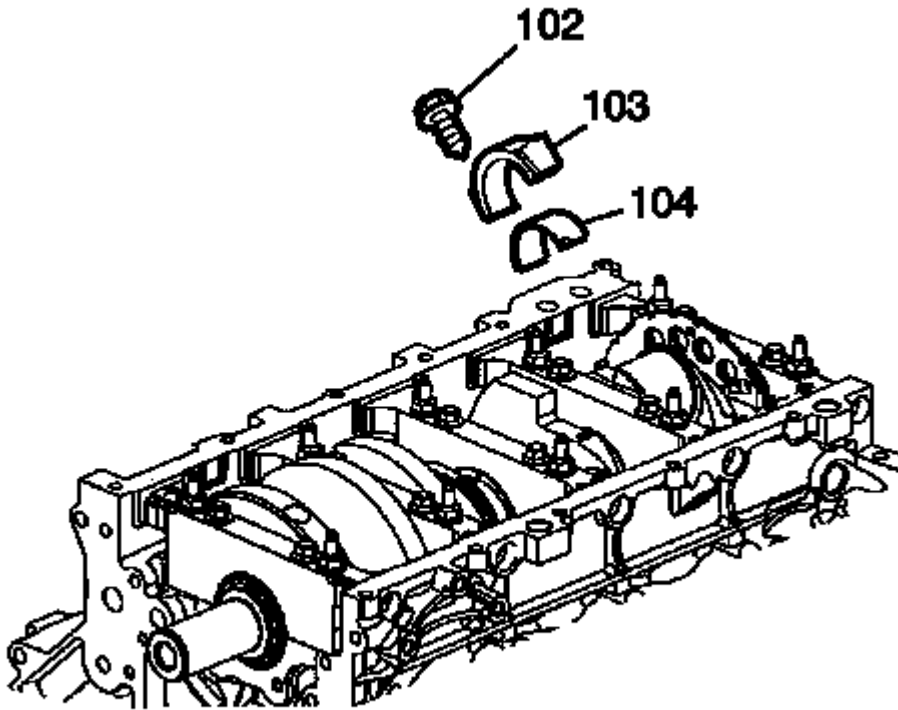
Connecting Rod Bolt, Cap & Bearing
